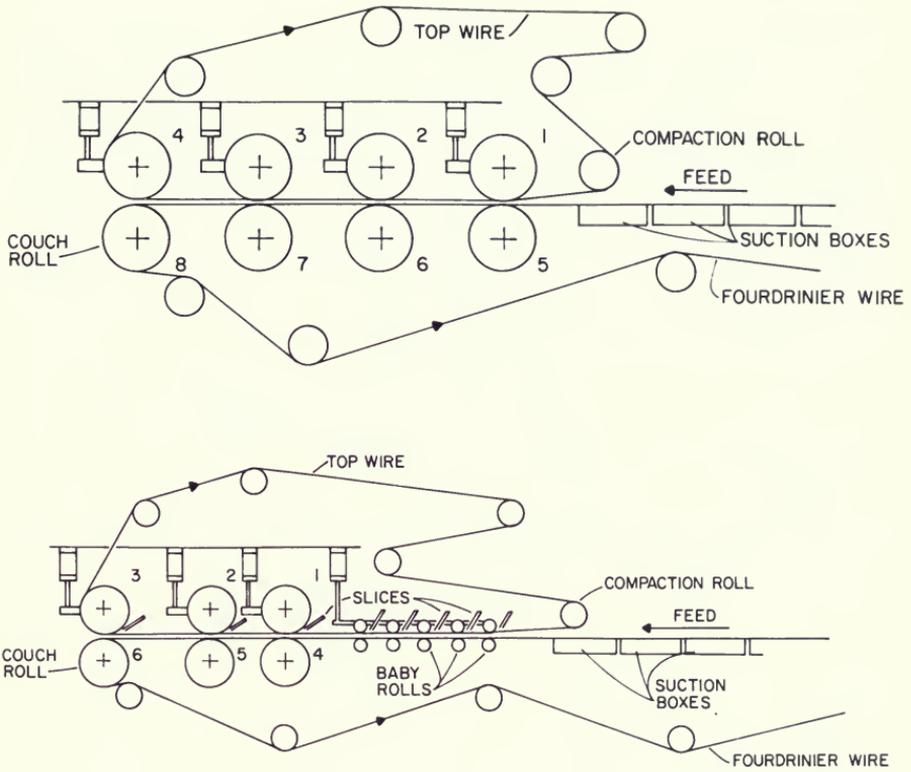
Wet-press sections of Fourdrinier machines. (Top) Insulation board machine. All rolls are 30 inches in diameter; rolls 1, 2, 3, and 4 are suction rolls; rolls 5, 6, and 7 are perforated shell rolls; roll 8 is rubber covered with no perforations. (Bottom) Hardboard machine. Rolls 1, 2, 3, and 6 are 24 inches in diameter, rubber covered, and not perforated; rolls 4 and 5 are also 24 inches in diameter, but are perforated. (Drawings from Suchsland and Woodson 1985.)
